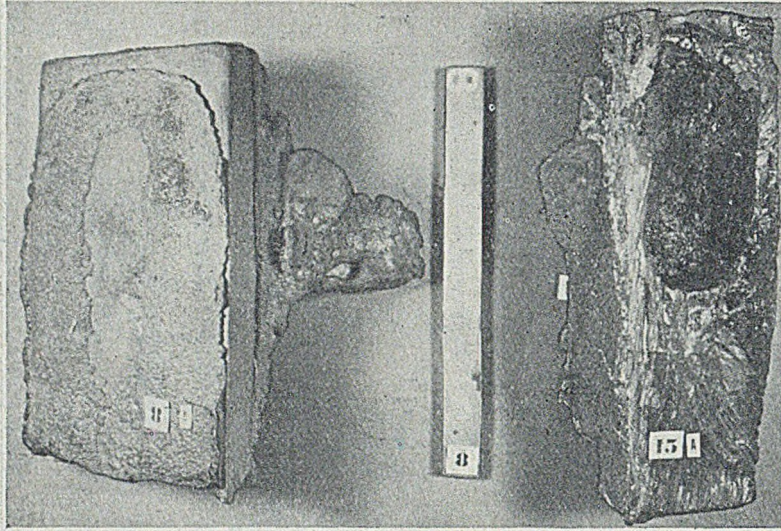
Metal Penetration into the Sand Mould, caused by Gas Pressure.
